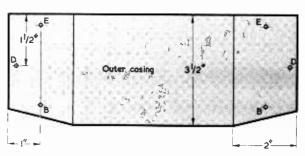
Dimensions of the sections which form the chassis and outer casing. Details of bending and assembly are given in the text
